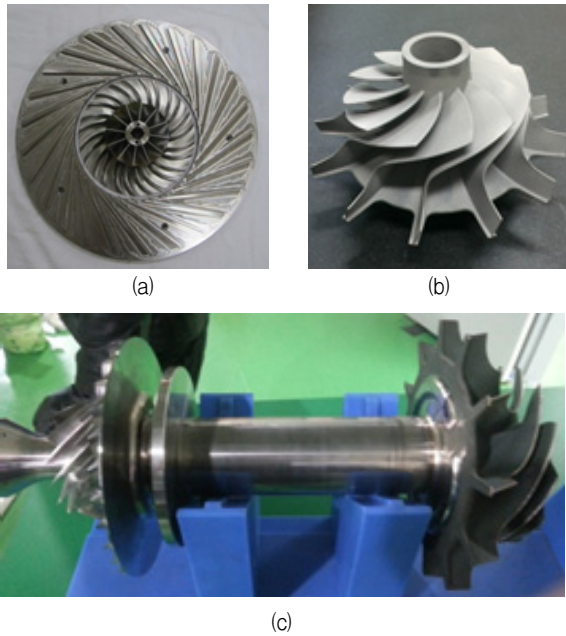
Micro gas turbine components: (a) Compressor impeller and vaned diffuser, (b) Turbine rotor, (c) Back to back layout of rotors
